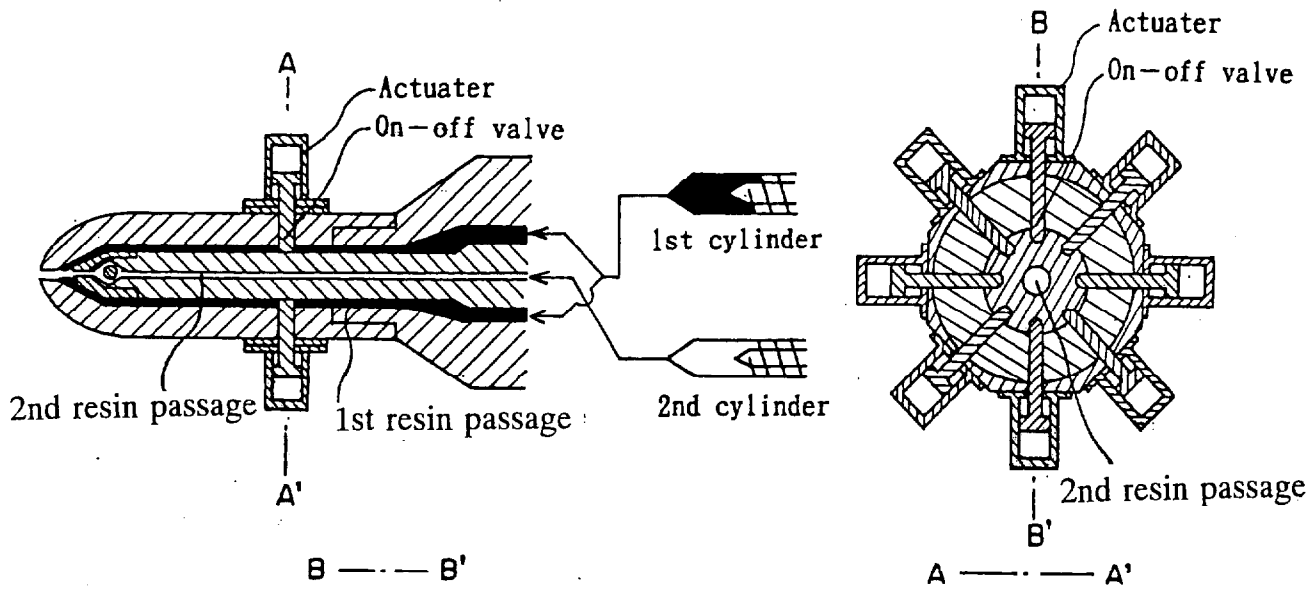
Nozzle structure of uniform skin / core SW molding used in experiment.
